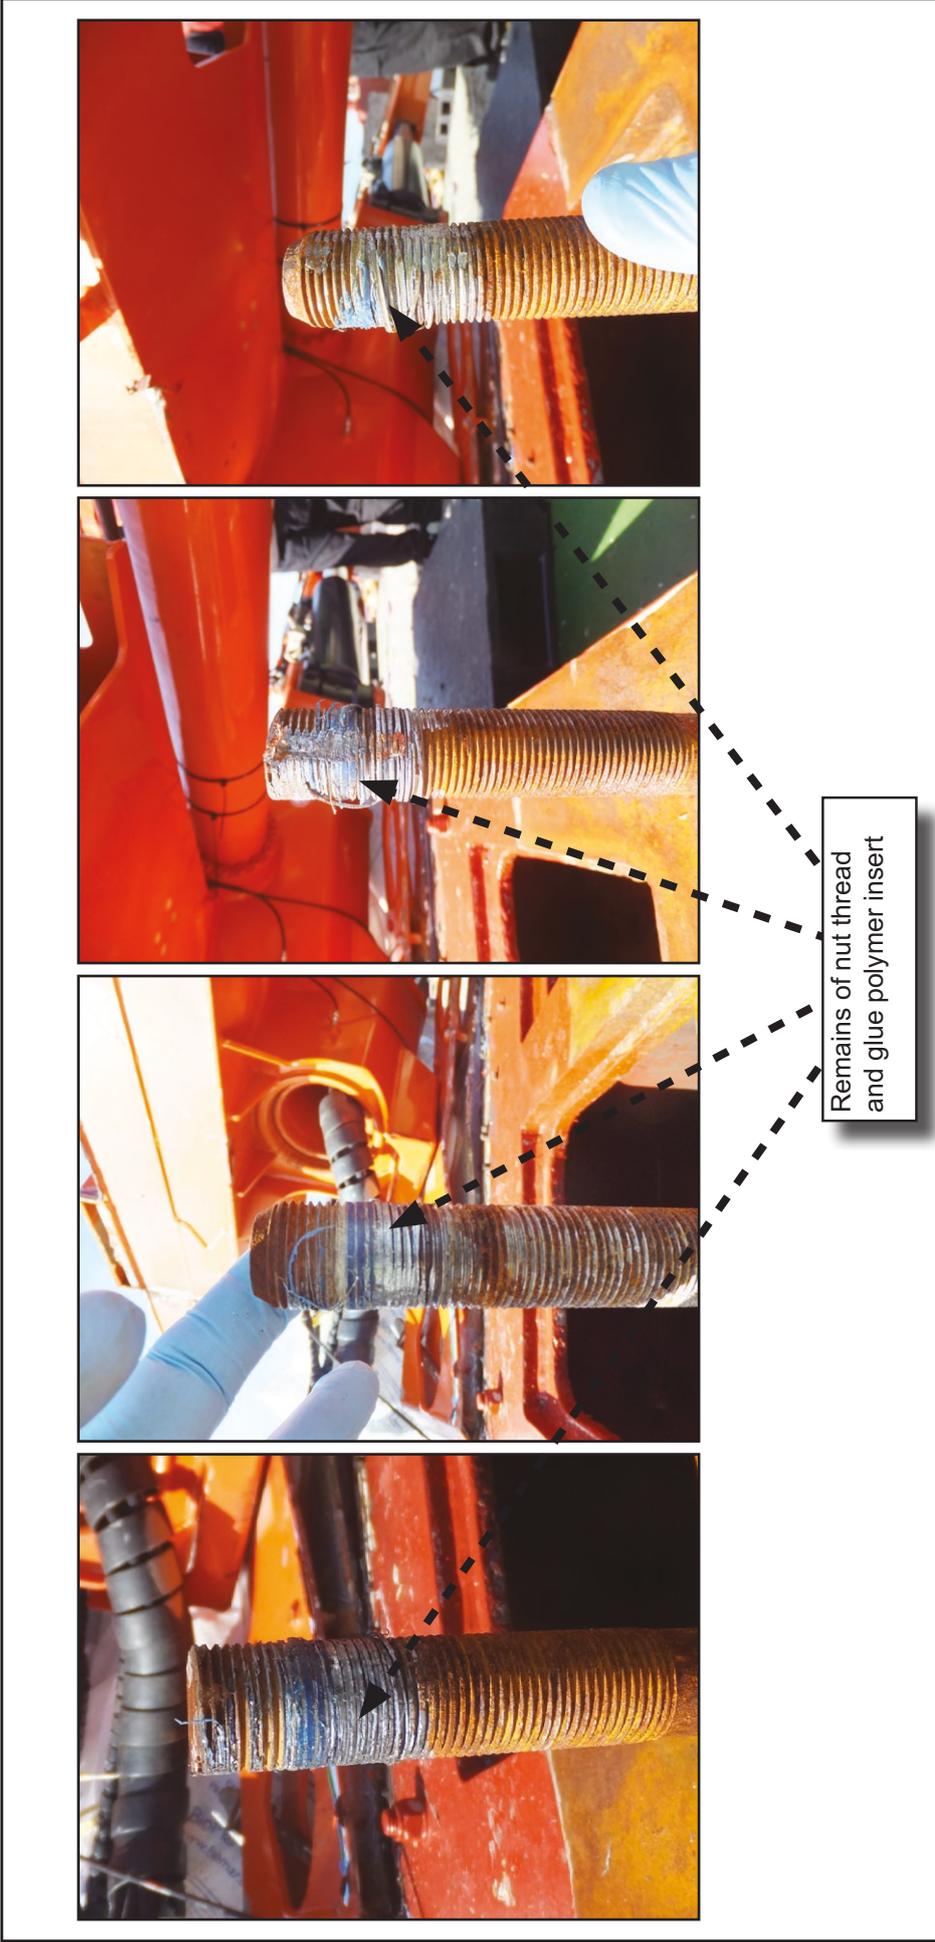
Tie bolts on the outboard side of the crane pedestal with the remains of the stripped lock nut threads
